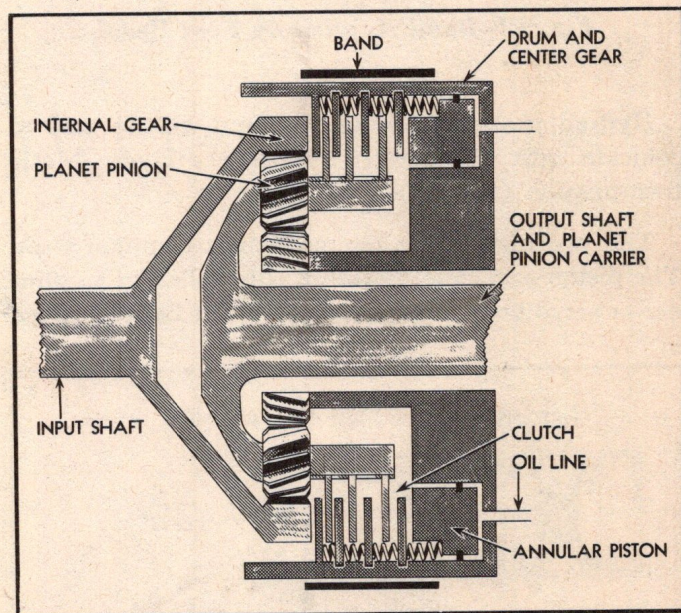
Planetary Gear Train of Simple Two-Speed Transmission
